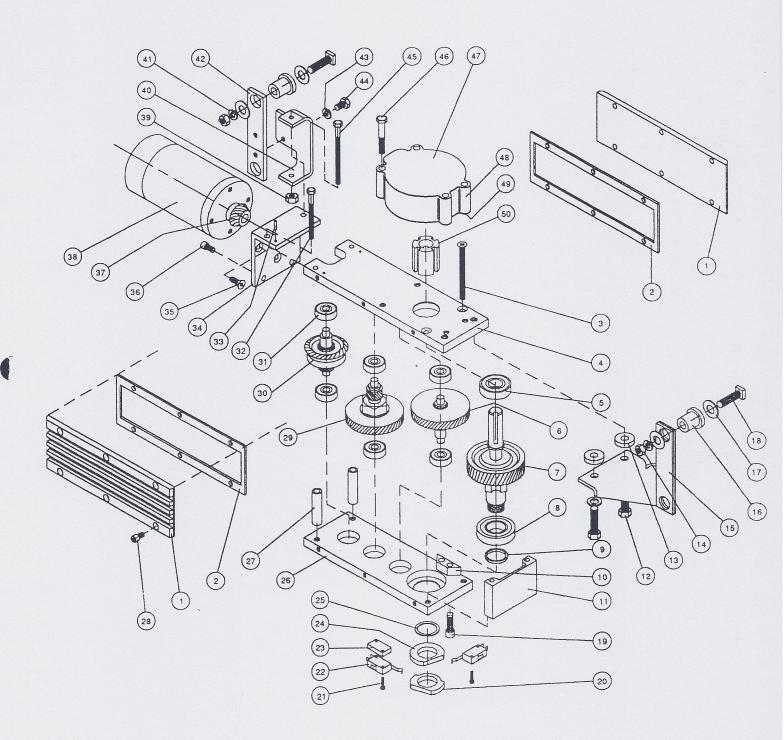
Series 4000 Master Control Assembly, Lace Assemblies and Operator Mounting Bracket
